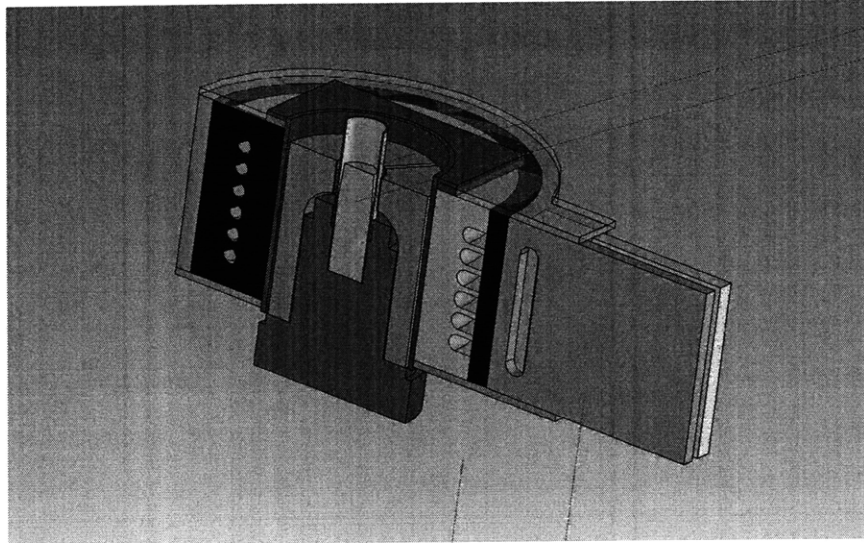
Solidworks drawing of the compression coil used for the MAGENFORM machine at MIT [27].
